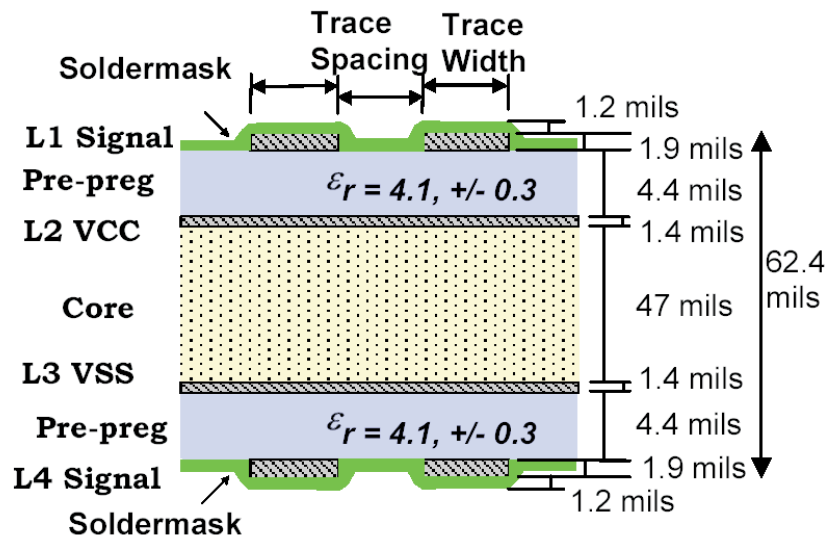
Printed-Circuit Board Stackup (FR-4 Example)
